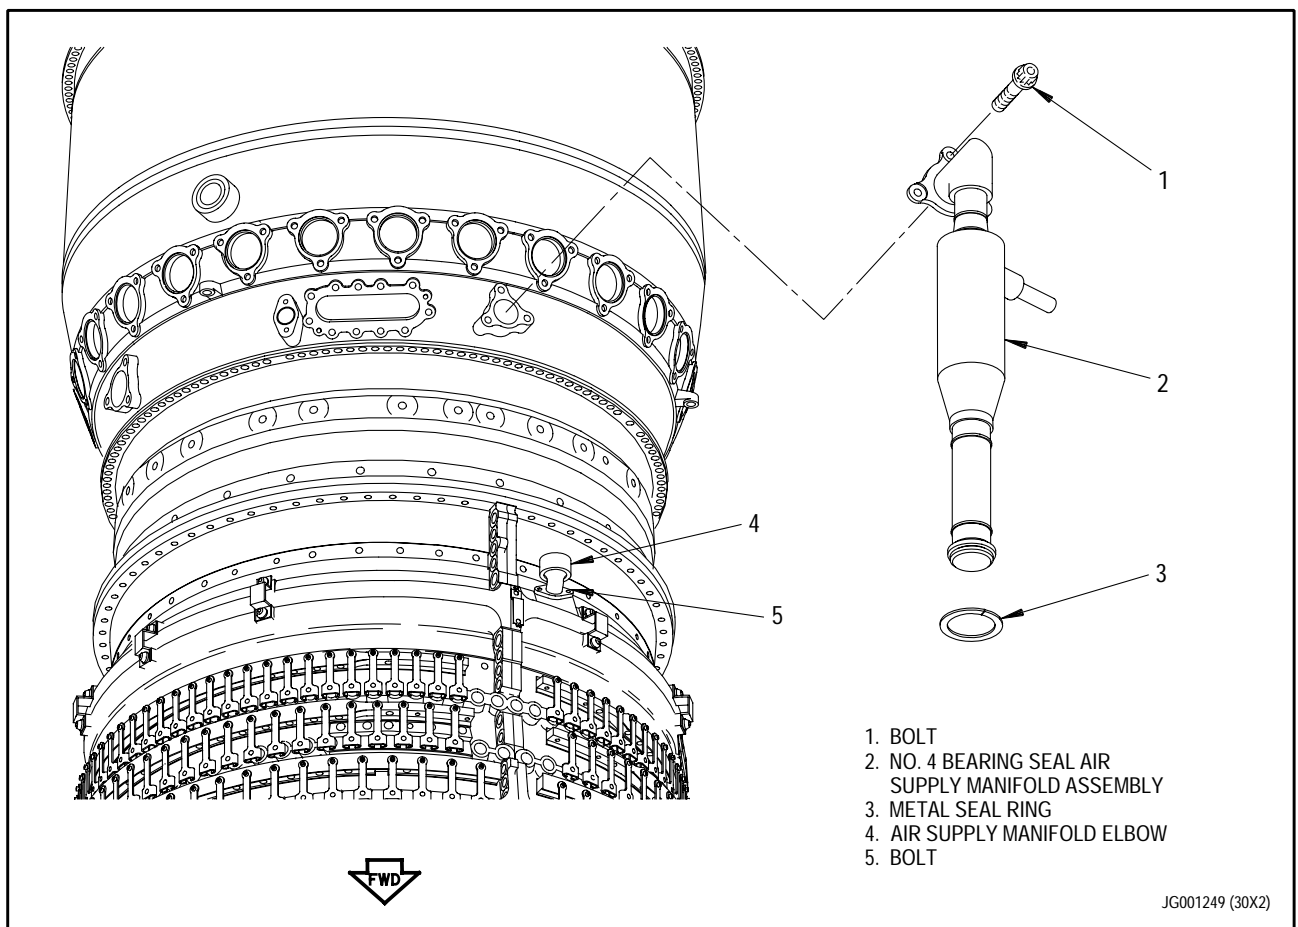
No. 4 Bearing Seal Air Supply Manifold Assembly - Removal
